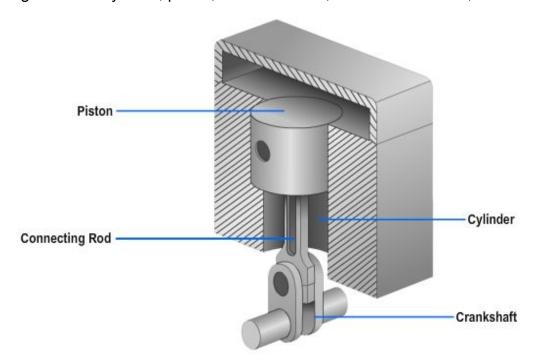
Cylinder, piston, connecting rod, and crankshaft for a one-cylinder engine.
